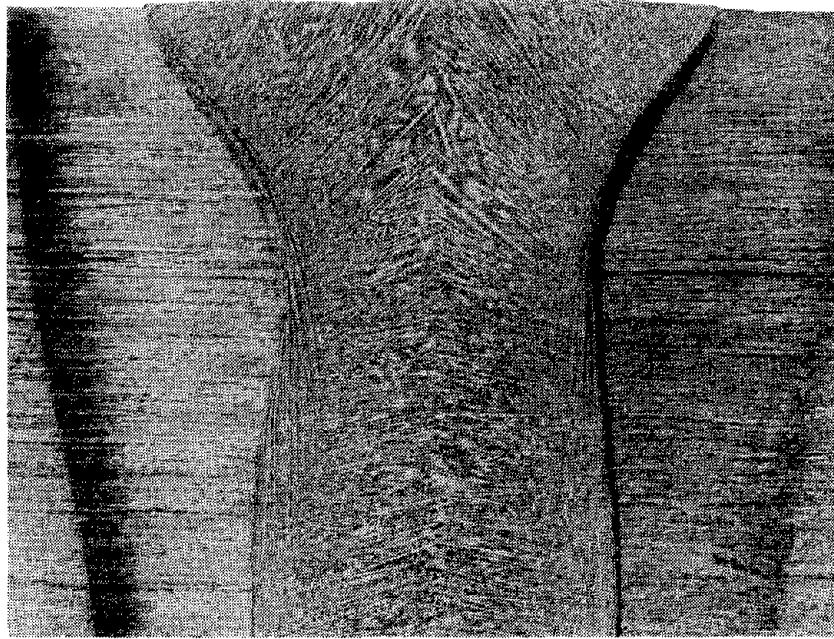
MACROSTRUCTURE OF THE HEAD AREA OF WELD 6. 1X.
